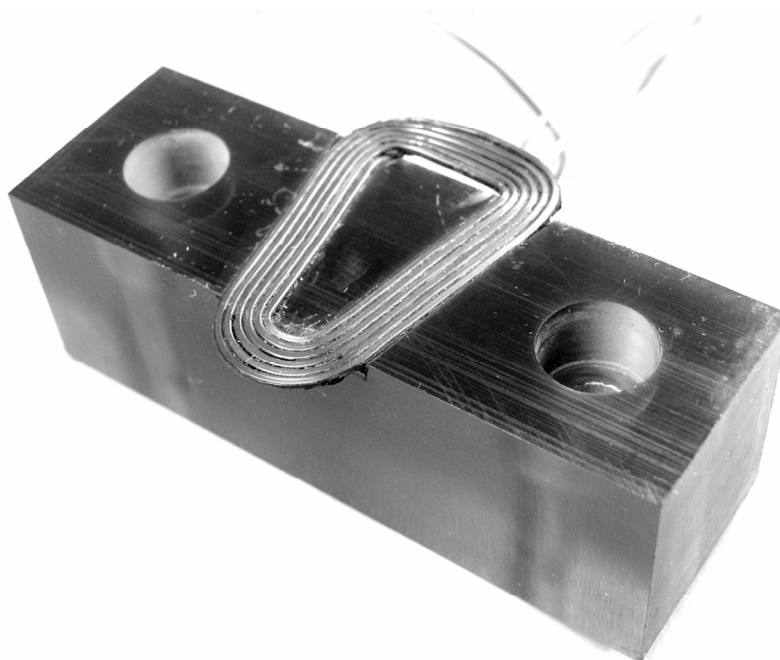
Axial Halbach magnetic bearing $r-\phi$ stator pole piece.
